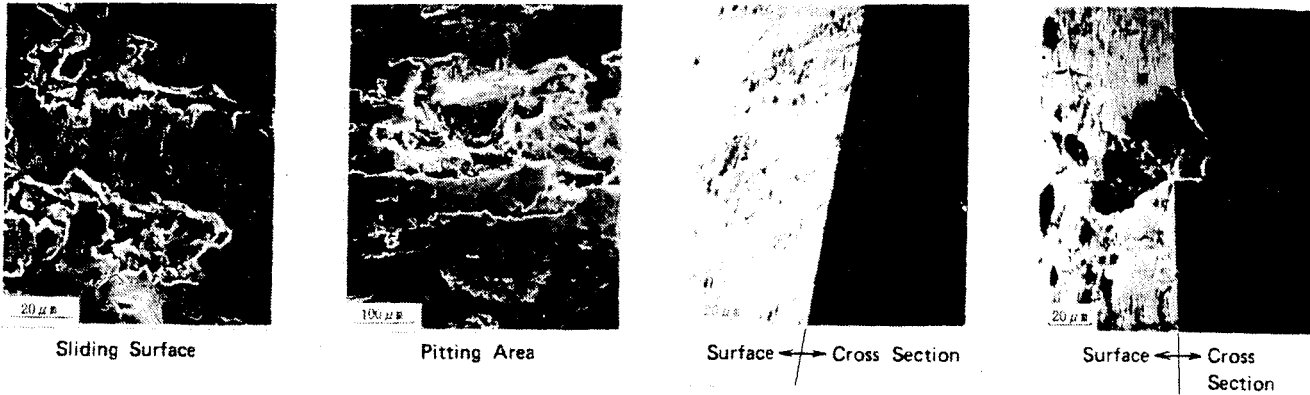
Observation by SEM of Carburized Test Piece Surface after Test
